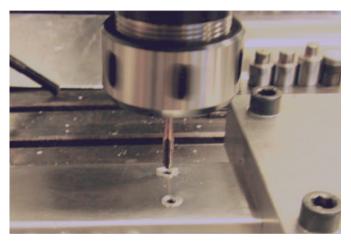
Threading by form tapping of a EN AW 5754 aluminium alloy sheet placed on a 50 mm x 50 mm steel tube [12].
